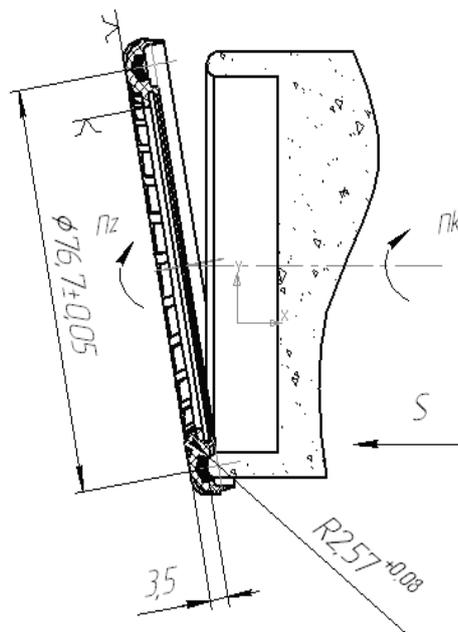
The perspective technology of contoured surfaces grinding like roller ways of rings of axial bearings by the cup grinding wheel back.
